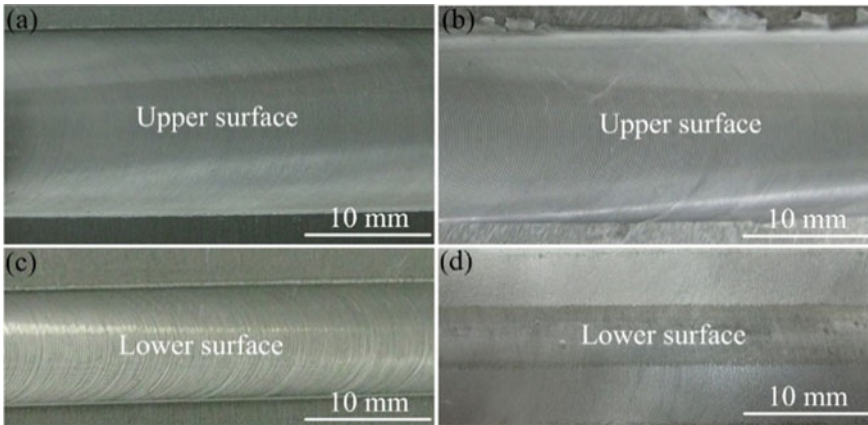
Surface appearances of the typical SSFSW₁ and conventional FSW joints: a upper surface of a SSFSW₁ joint; b upper surface of a conventional FSW joint; c lower surfaces of a SSFSW₁ joint; d lower surface of a conventional FSW joint
